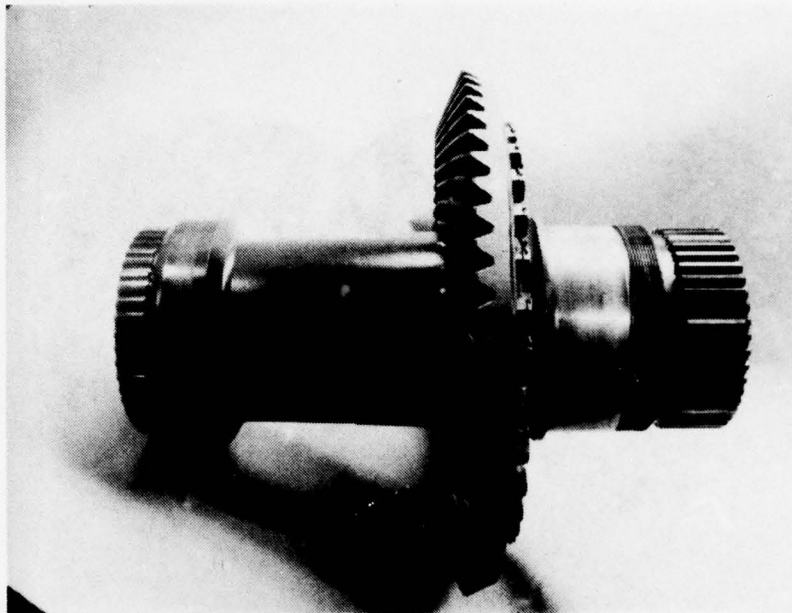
Main input gear and gearshaft after 21-minute loss-of-lube retest of transmission number 1.
